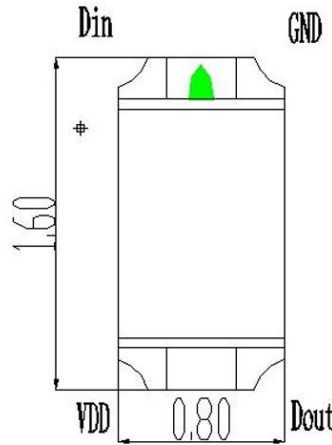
IN-PIS63BTPB Package Outline Dimensions
